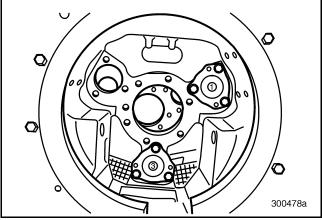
No. 1 and No. 3 Front Countershaft Front Bearing Covers Installed
